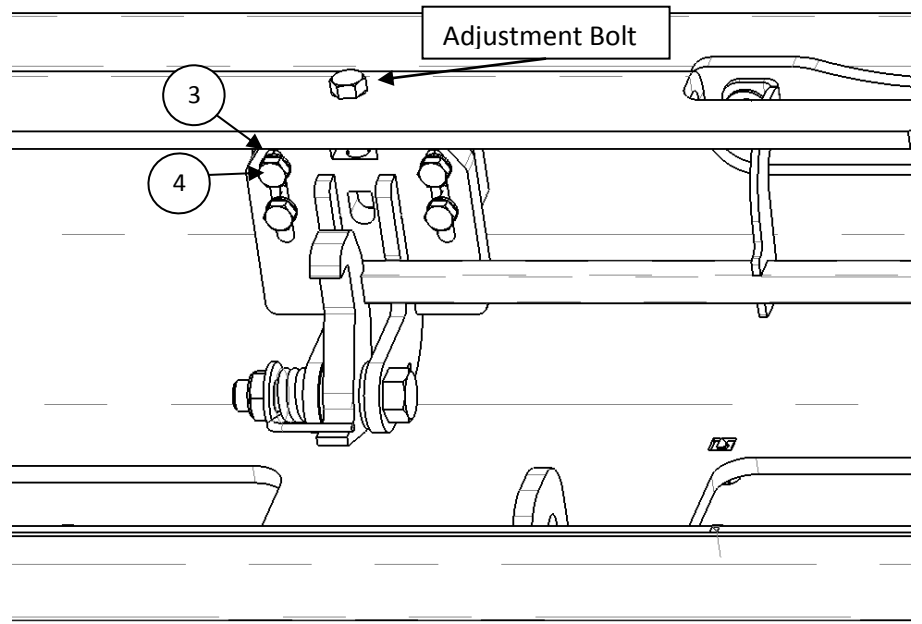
Slam Latch Hanger Adjustment (driver's side shown).
